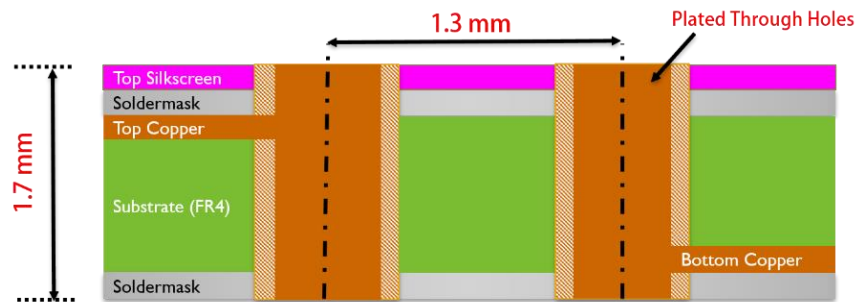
Printed circuit board (PCB) layer structure. Two-conductive-layer PCB was designed for the 1st generation EP chip (Top Copper and Bottom Copper). The PCB board was drilled with through-holes with 300 μm diameter for needle housing, and the through-holes were plated with copper to provide an electrical connection. The center-to-center distance between holes was designed to be 1.3 mm.
